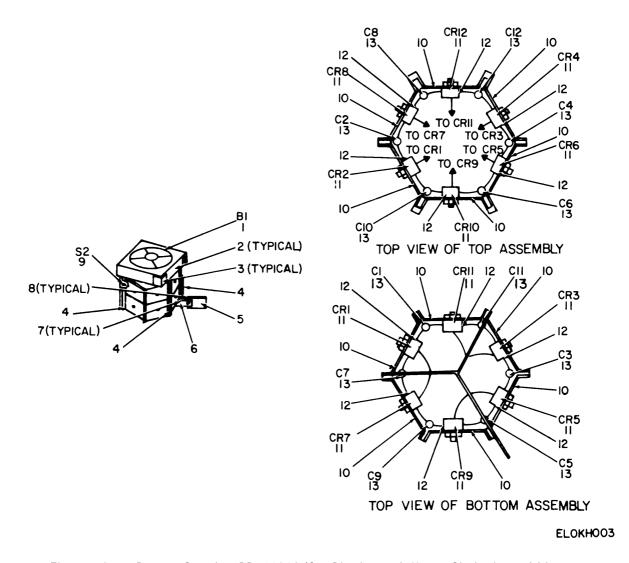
Power Supply PP-4606A/G, Diode and Heat Sink Assemblies.
